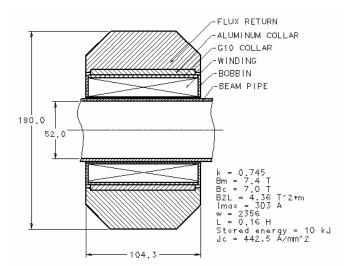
Cross sectional view of the first Test Solenoid, shown with iron yoke. Dimensions are given in mm.
